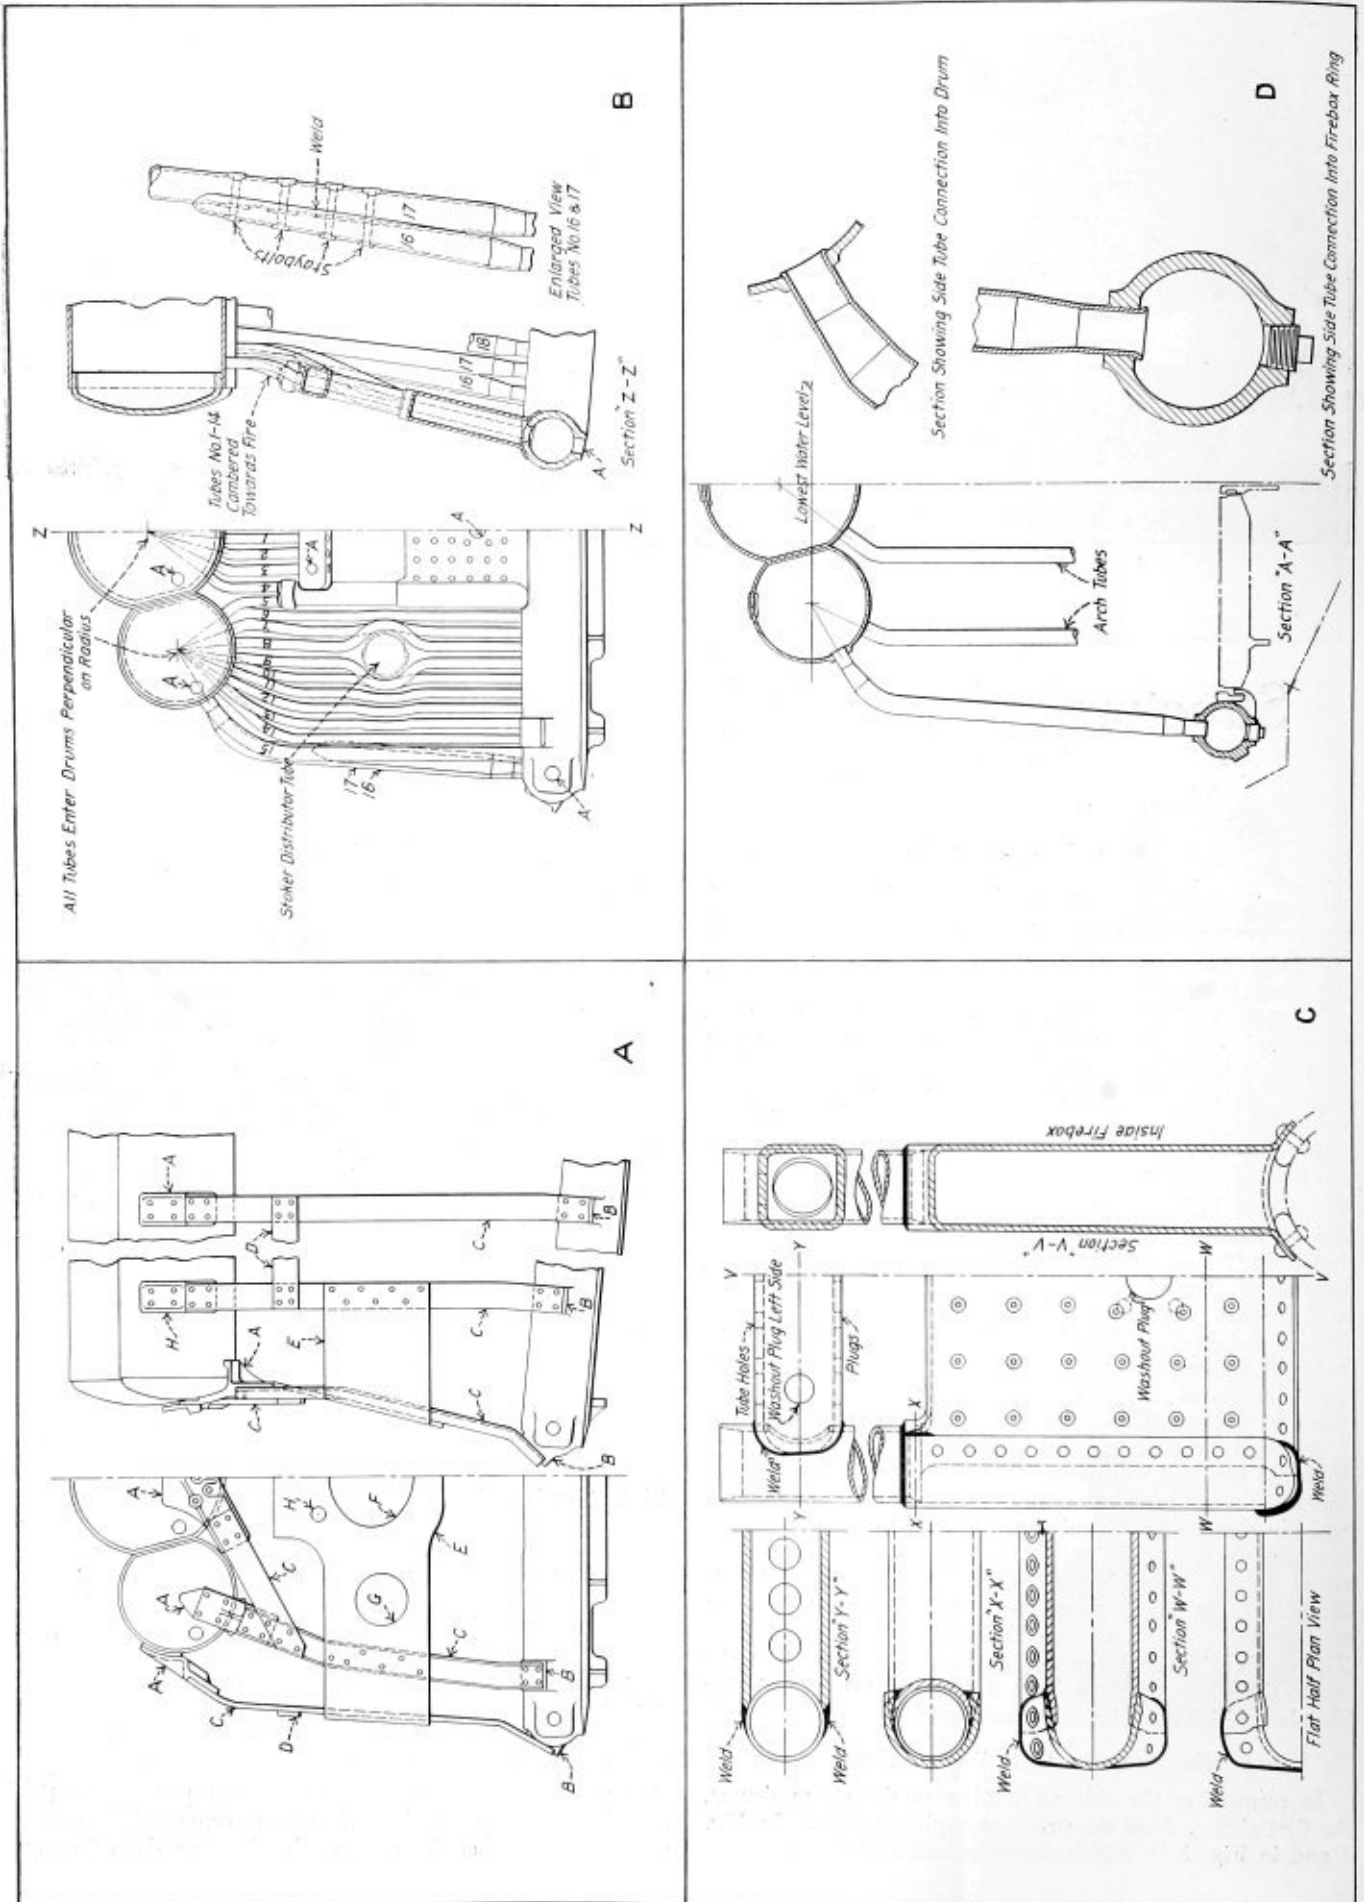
A.—Firebox bracing. B.—Backhead tube arrangement. C.—Detail of backhead at firedoor. D.—Side tubes and arch tube details.
